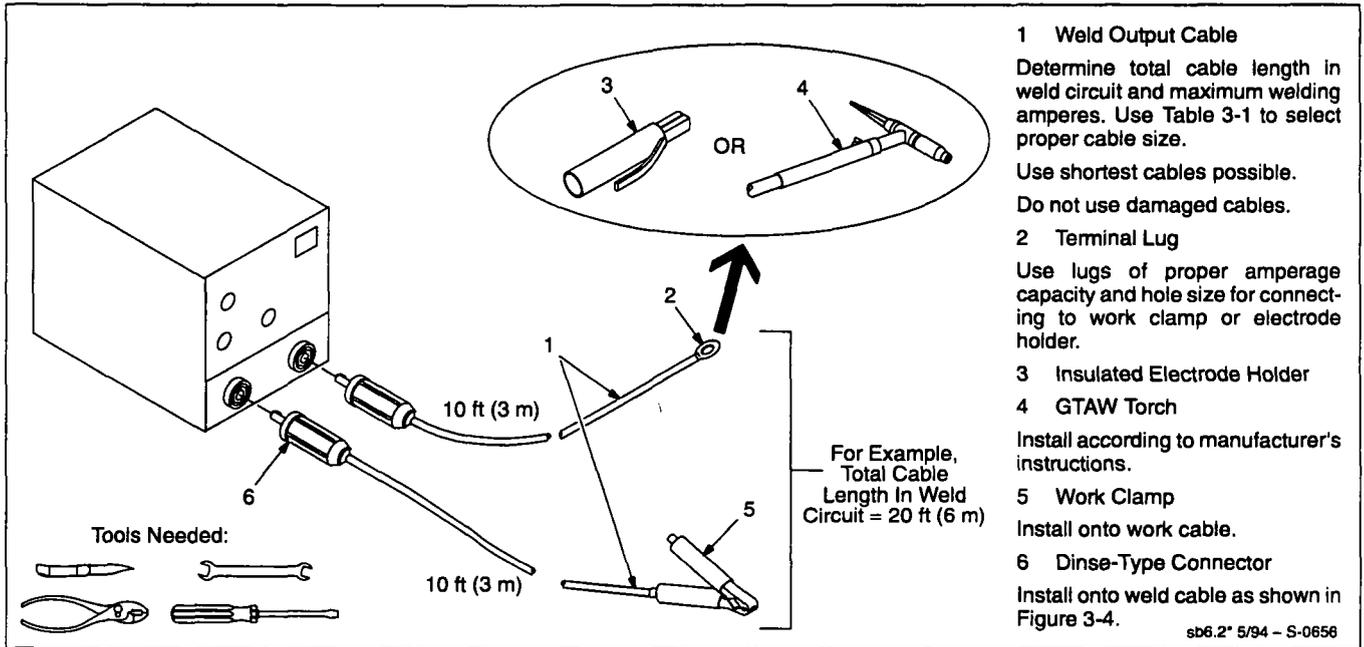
Selecting And Preparing Weld Output Cables
